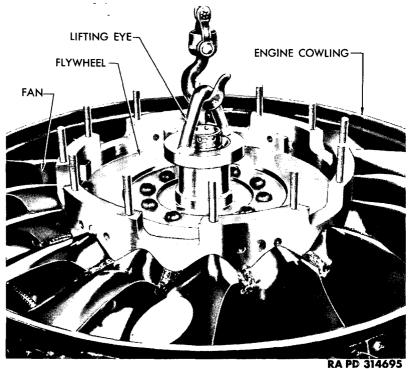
Removing Flywheel and Fan Assembly with Lifting Eye
